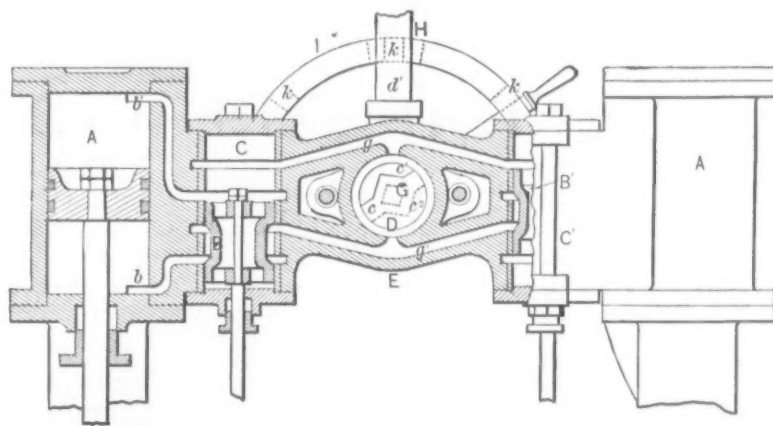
Sectional Side View of Double-Cylinder Engine Fitted with Valve.
